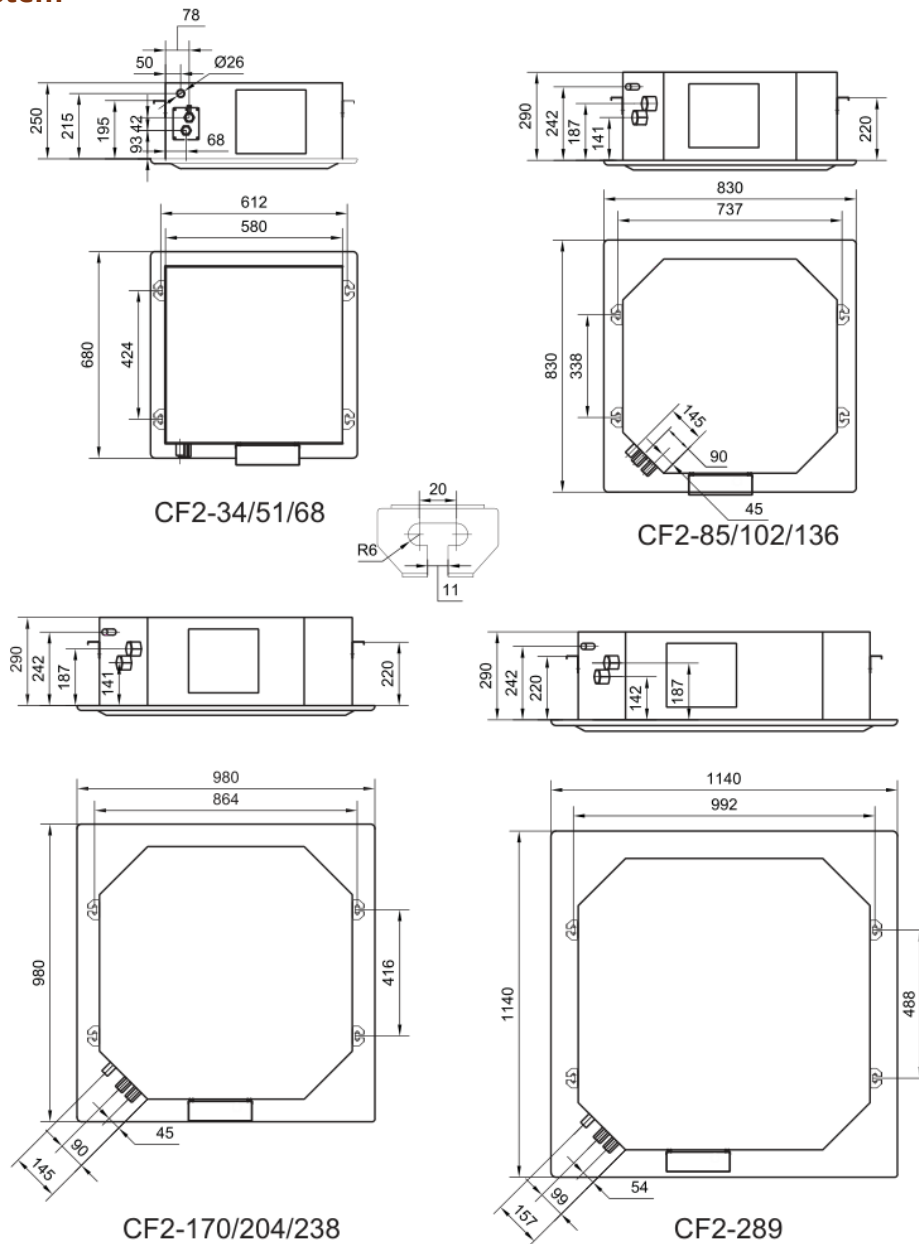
Dimensions, CF2 (all dimensions in mm)
